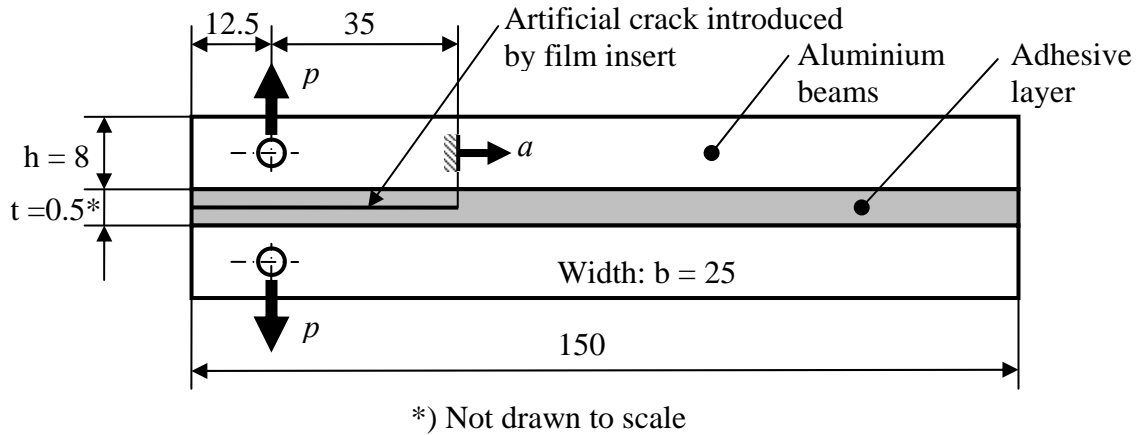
Specimen dimensions (in mm) of the Double Cantilever Beam (DCB) specimen for quasi-static Mode I adhesive fracture toughness testing.
